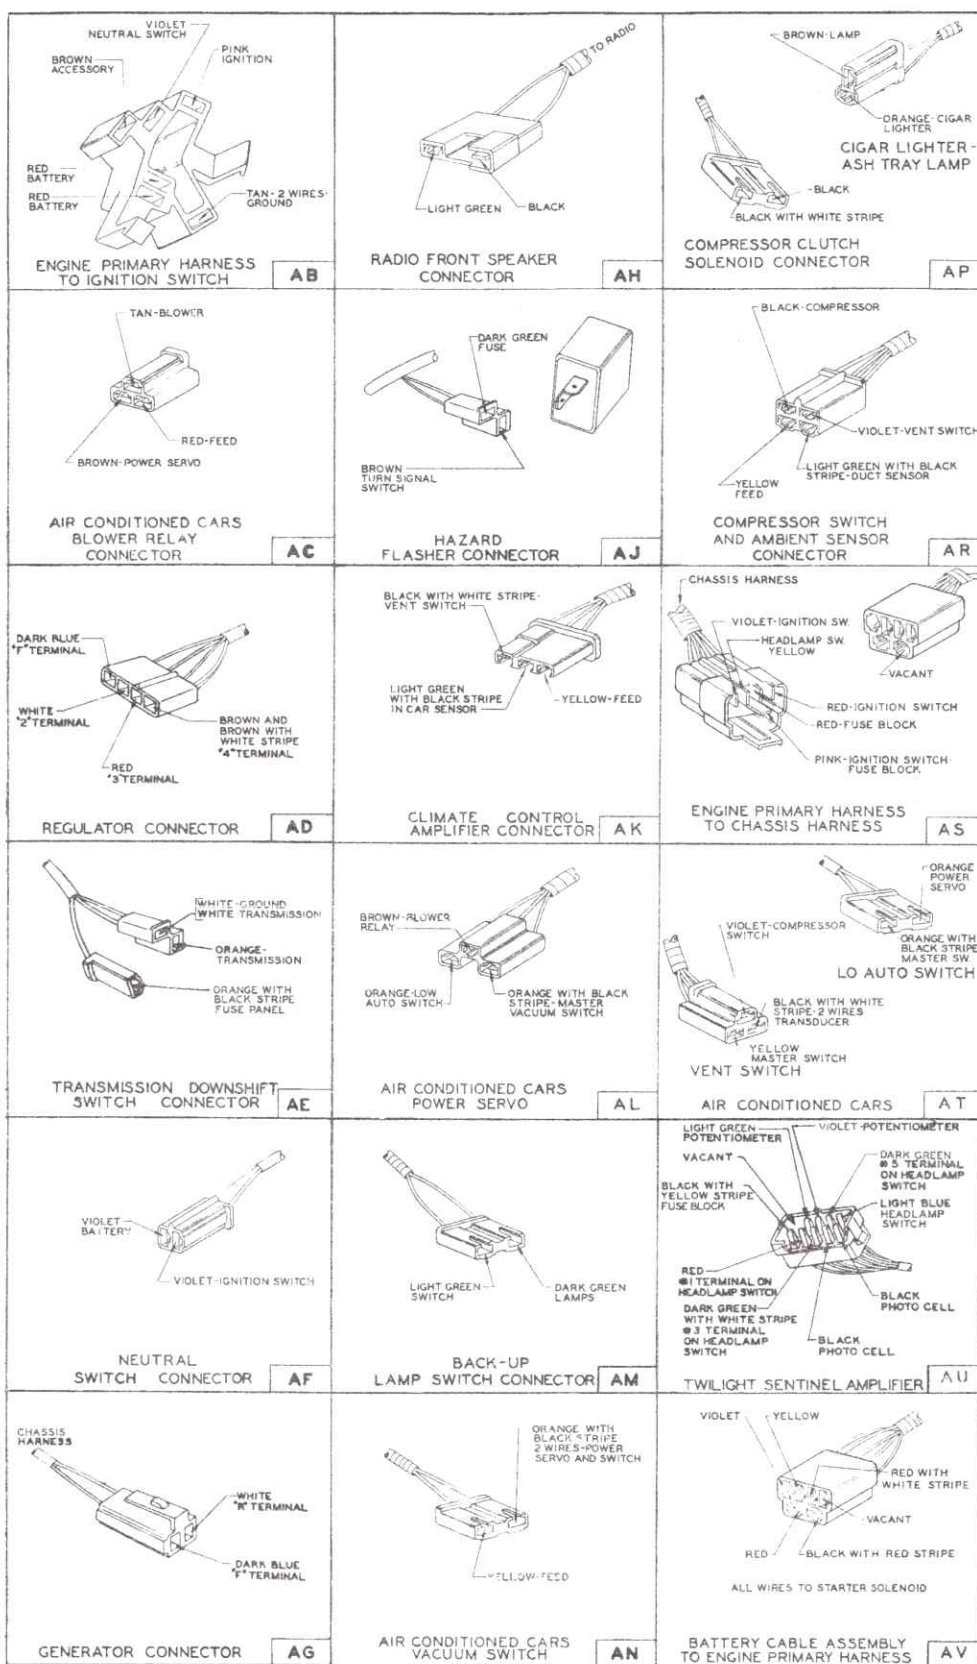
Chassis Wiring Connectors - 693 Styles
